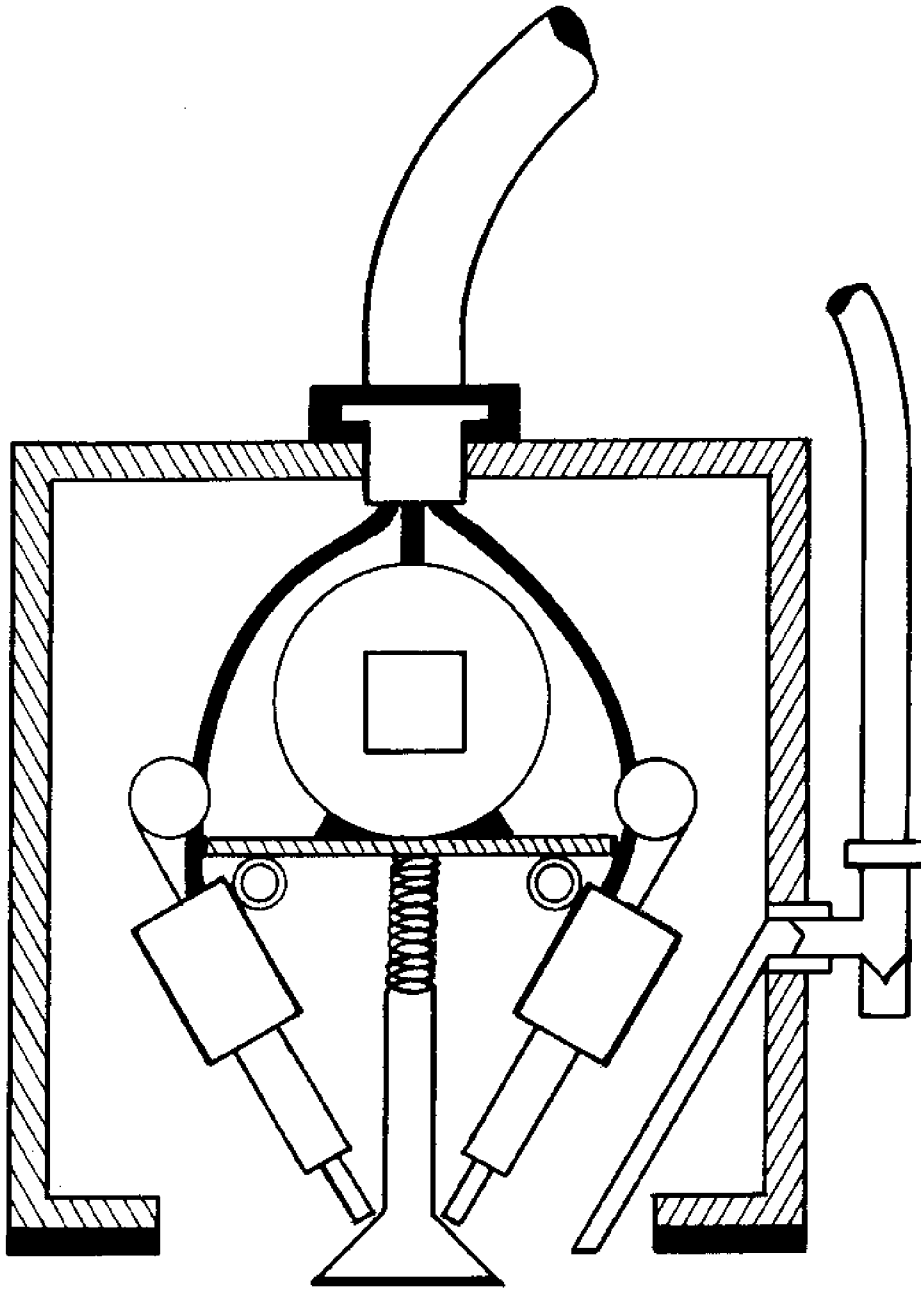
Conceptual design of automatic underwater welding machine
